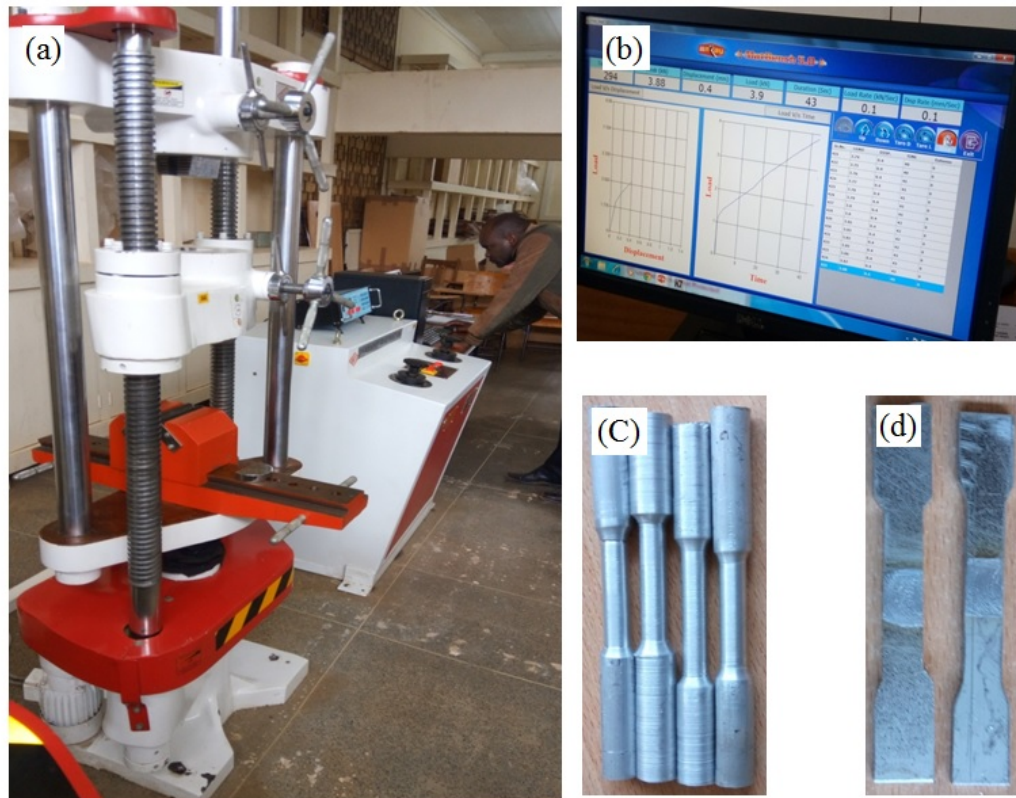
Tensile Test Apparatus: (a) Enkay Universal Tensile Testing Machine; (b) Mat Bench 5.0 Software; (c) Round Specimens and (d) Flat Specimens.
